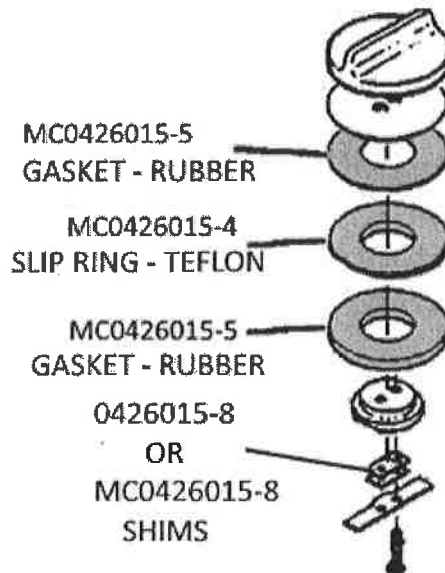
Exploded View of Cessna Fuel Cap Assembly P/N 0426015-1 w/ McFarlane Gaskets, Slip Ring & Shims
